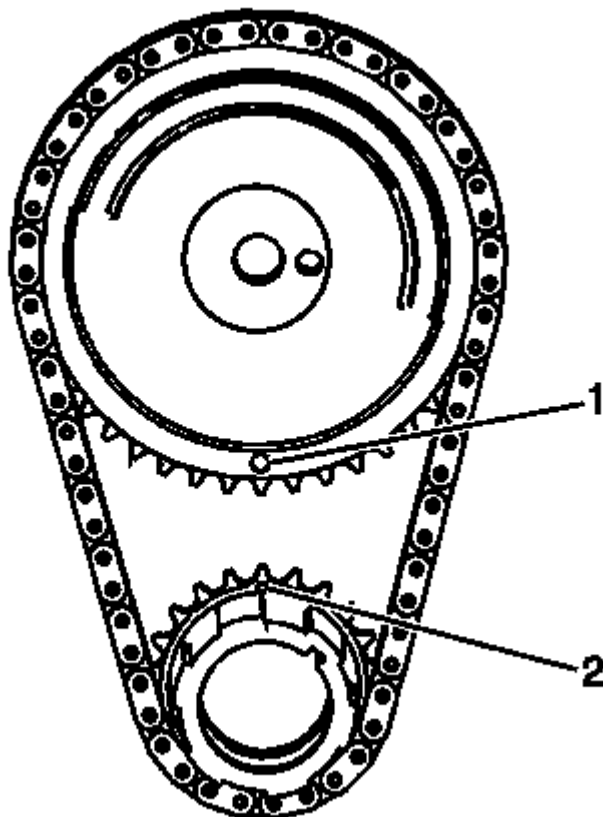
Identifying Camshaft & Crankshaft Sprocket Marks
